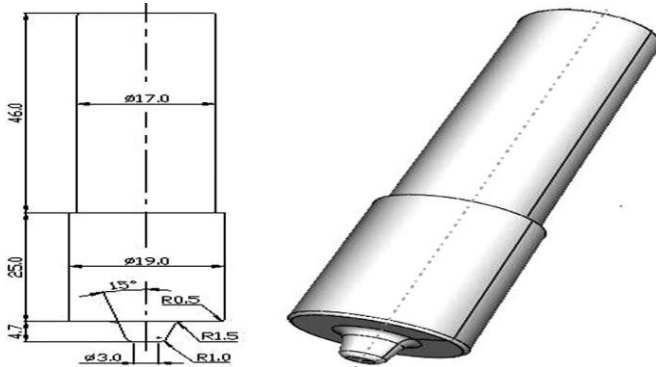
Welding tool use for the experiment and numerical analysis
